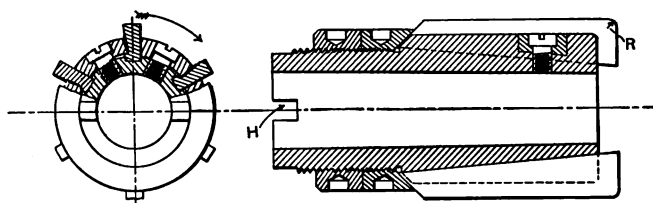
Adjustable Shell Reamer with Inserted Blades
